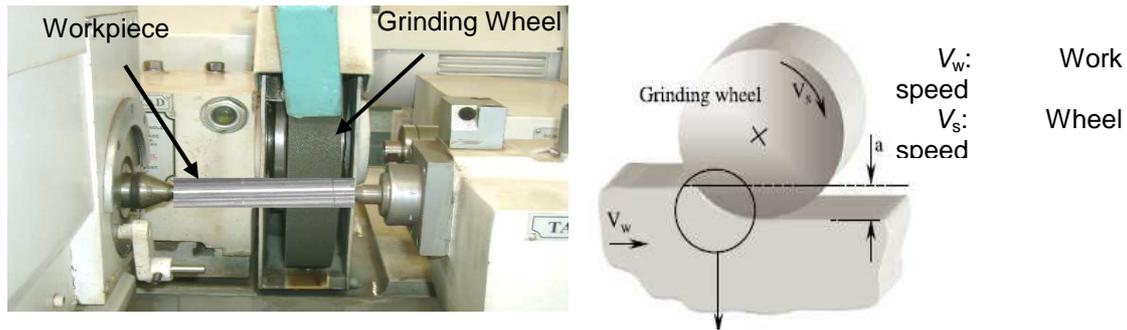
(a) Close view of the grinding operation, and (b) grinding parameters  $V_w$ ,  $V_s$ ,  $a$
